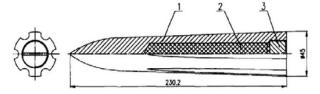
A certain projectile of grooved cone (1-projectile; 2- filler; 3-seal cover)
